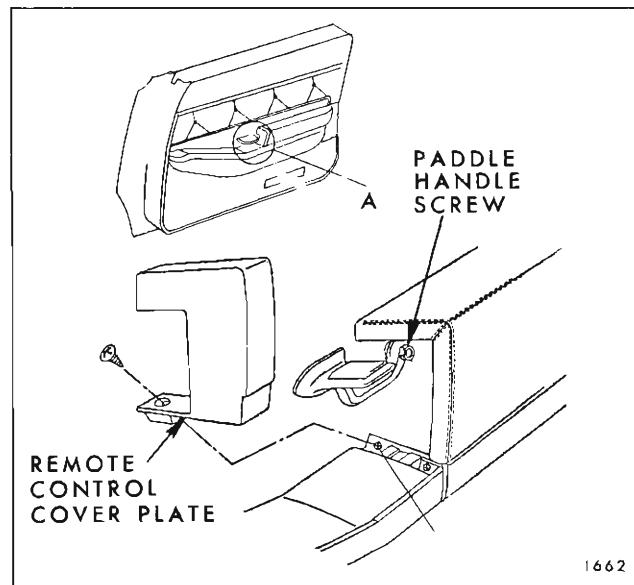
D11—Remote Control Handle and Cover Plate Front Door Shown - Rear Door Typical
